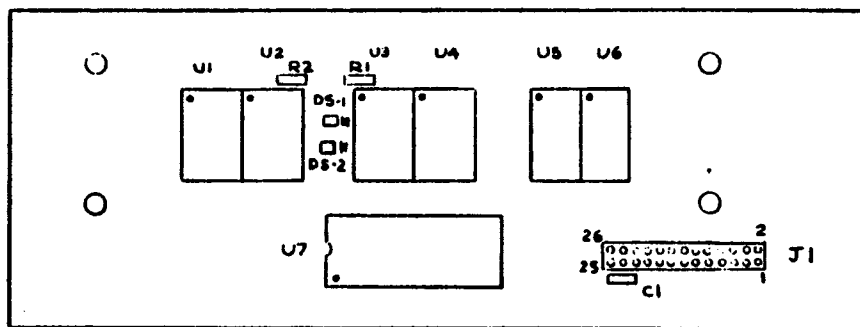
ASSEMBLY DRAWING - DISPLAY BOARD A4
